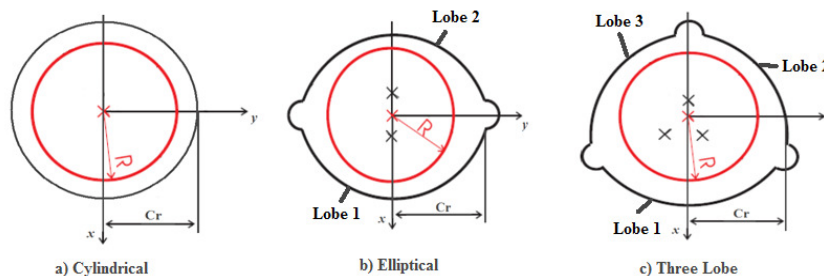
Design of Cylindrical, Elliptical and Three-Lobe Bearings
